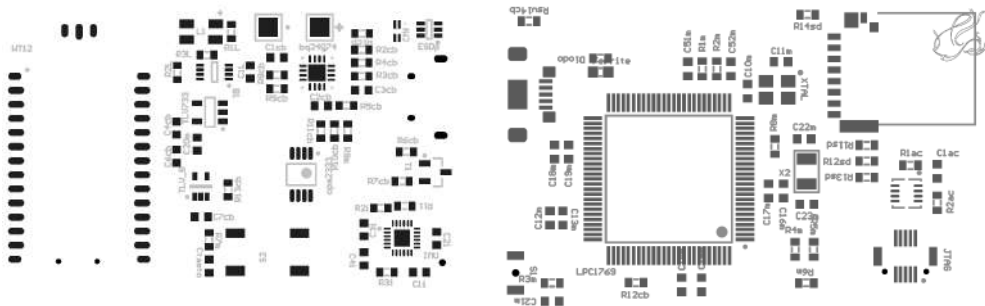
Drowning of the final board TOP layer (left) BOTTOM layer (right)
